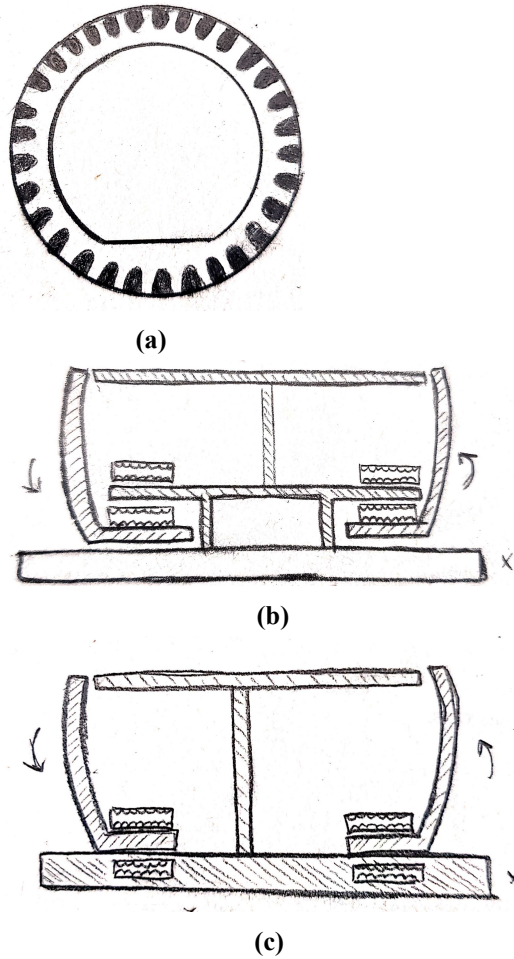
a) Align PM. b) One rotating Align PM on the knob and another Align PM on the fixed part inside the knob. c) One rotating Align PM on the knob and another Align PM on the fixed bottom part of the knob.
